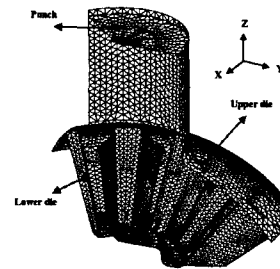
Created triangular meshes of die surface for bevel gear forging
